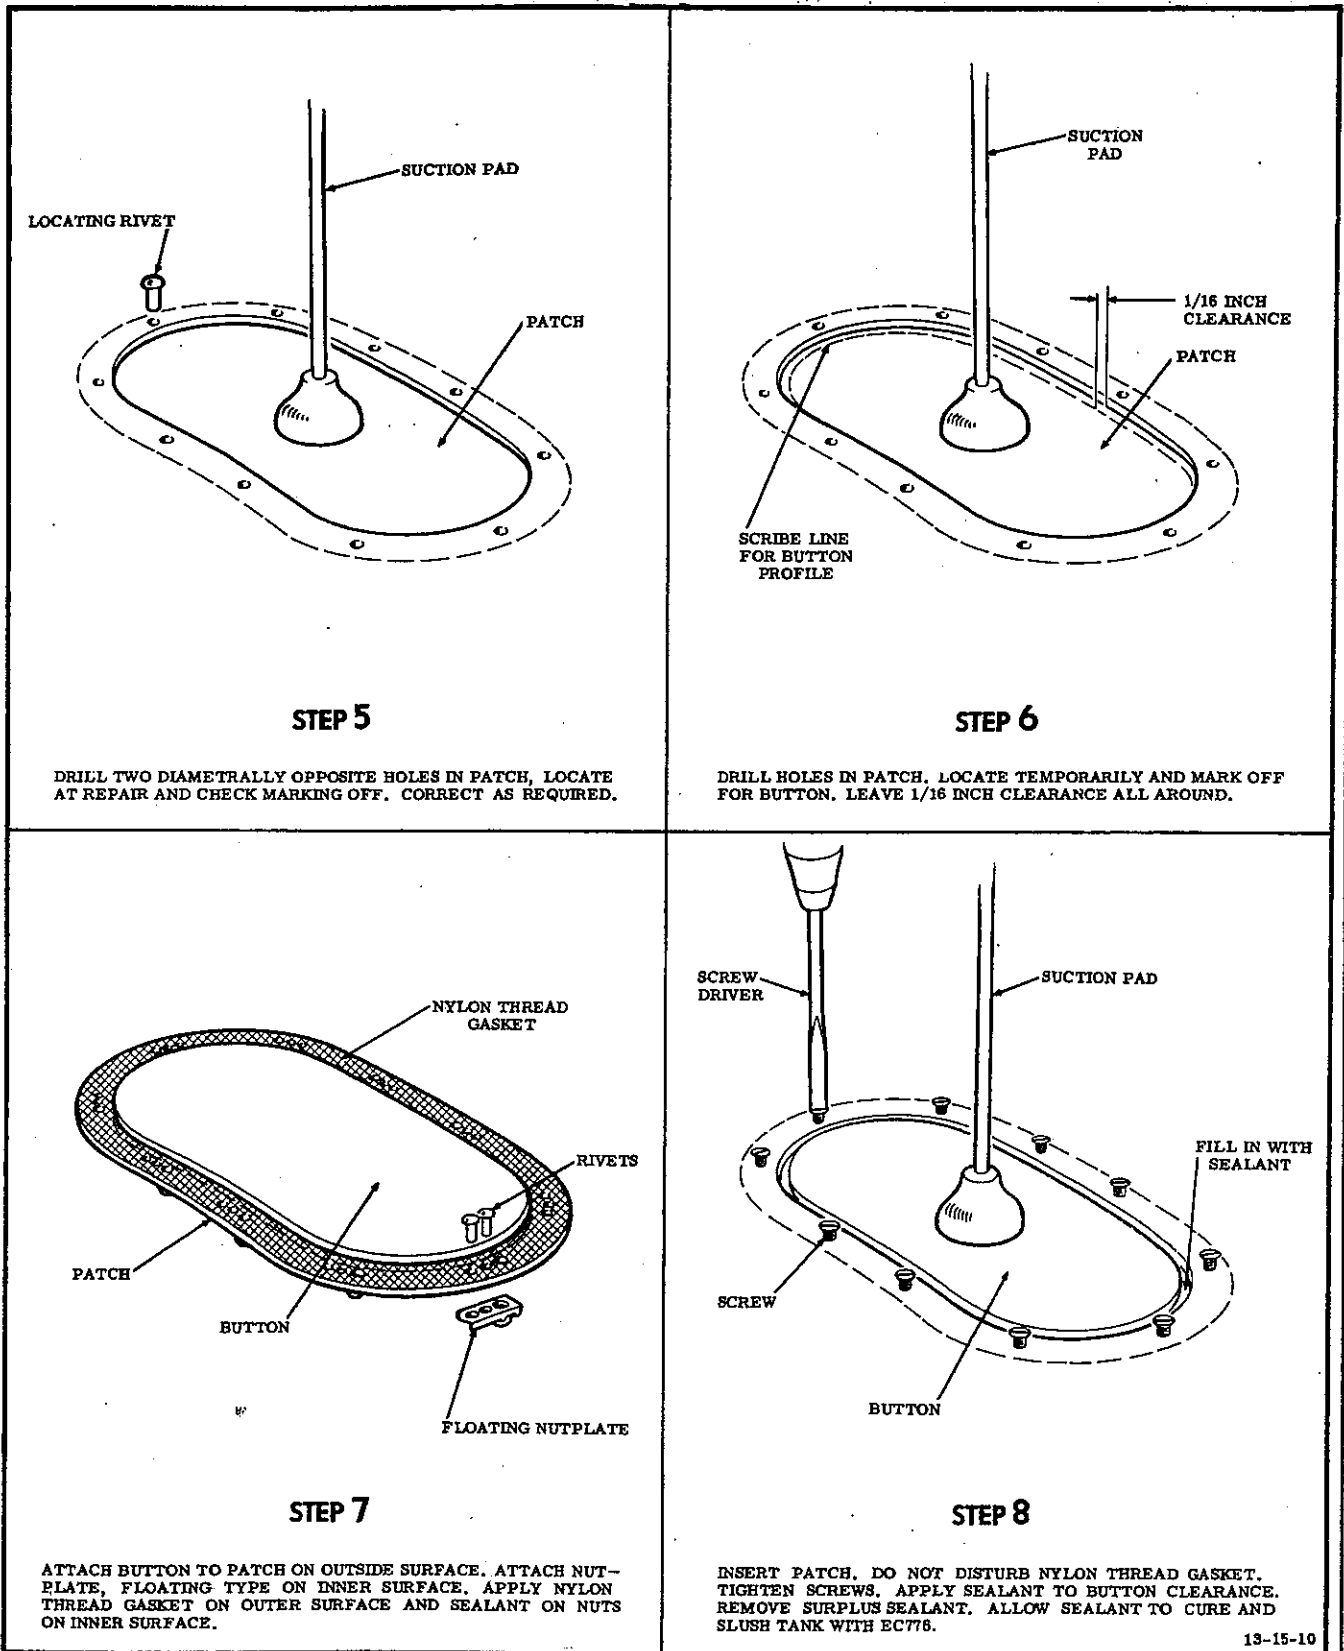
(Sheet 1 of 2) Making Flush Repair Patch, Reverse Side Inaccessible
